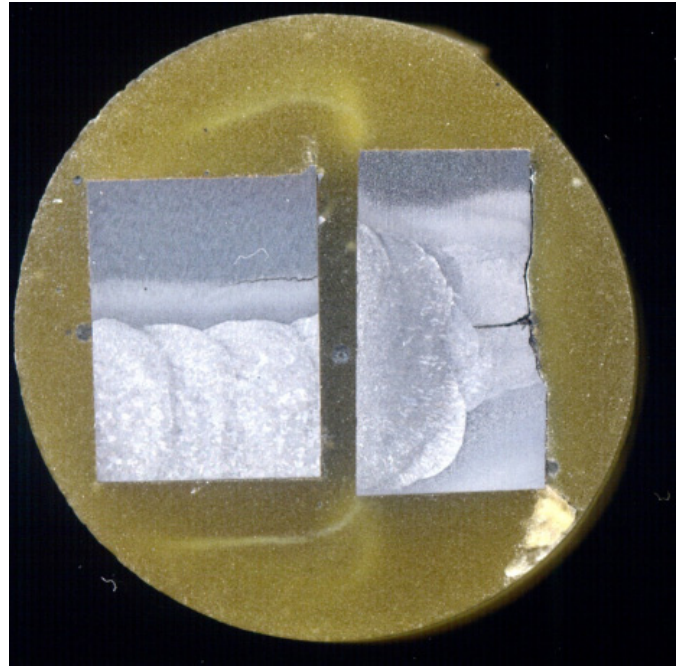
The view from the face of the weld, an outer surface – a crack in the HAZ and a cross section – a crack in the weld from the root side of the weld
